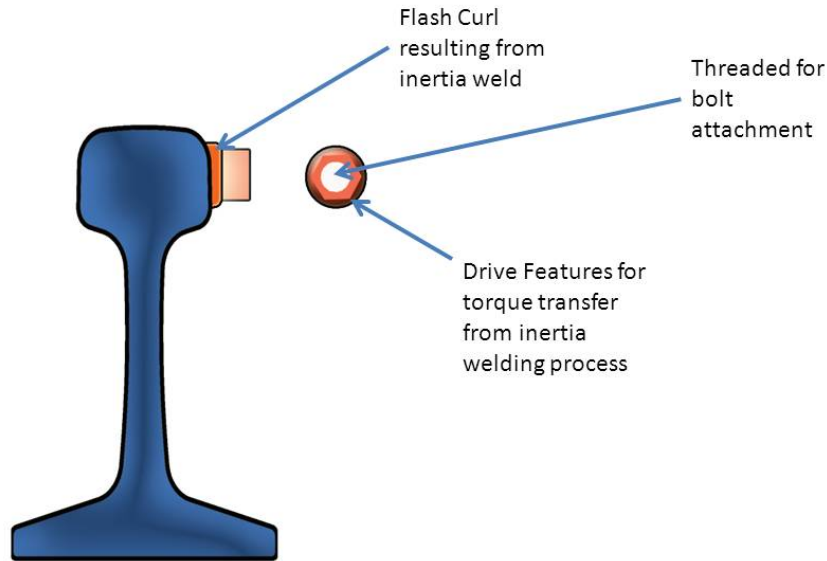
Inertia Weld Showing Lug Attached to Rail Head
